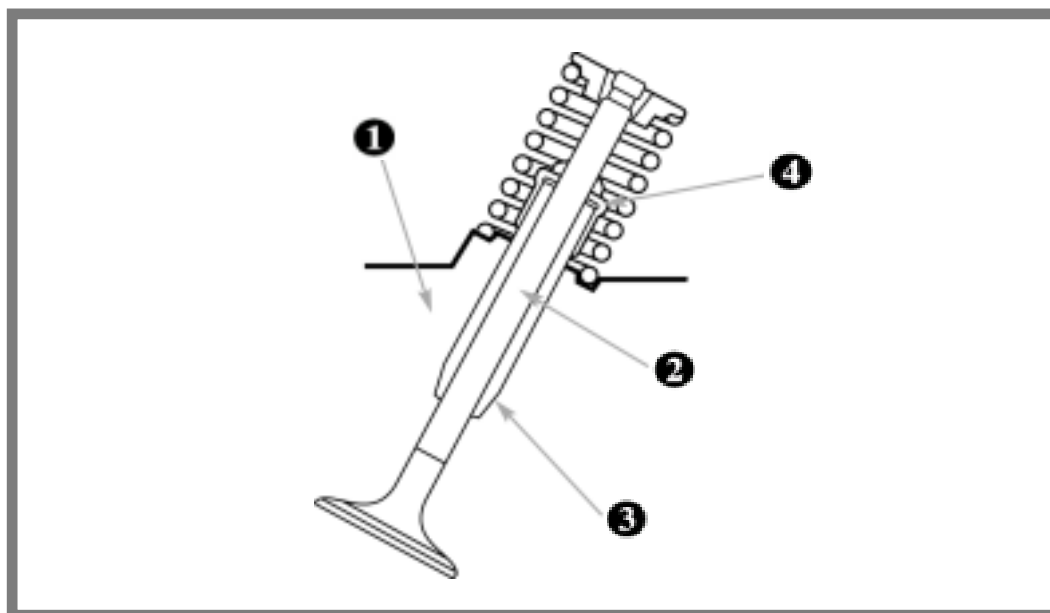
Valve guides hold the valve stem so the valve fits squarely on its seat.
